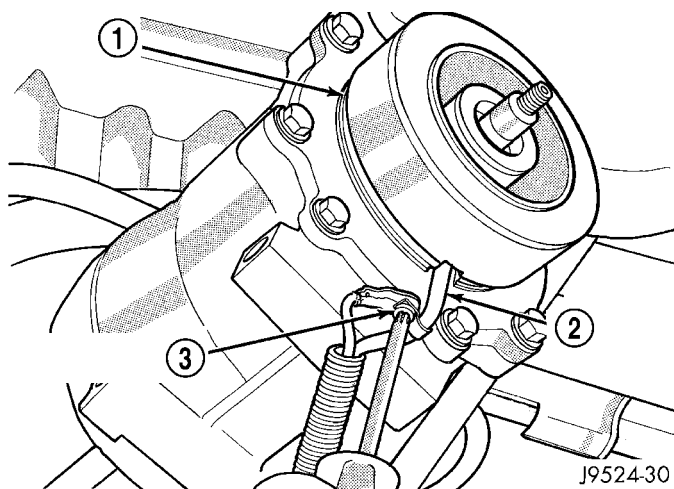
CLUTCH COIL LEAD WIRE HARNESS - Typical
